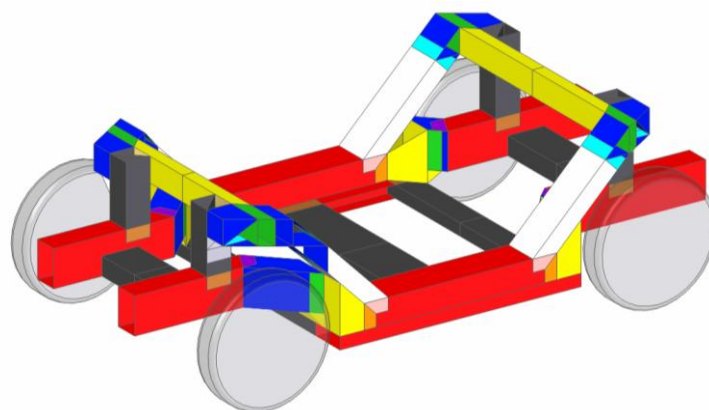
Three-quarter view of Aluminum body structure (color-coded according to parts and joint area)
